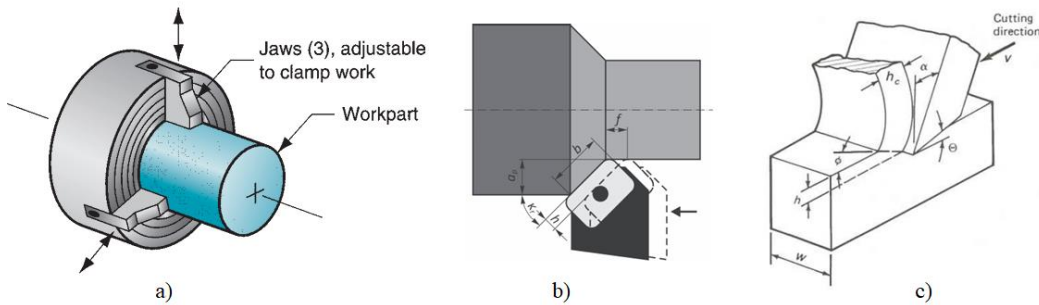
a) Three-jaw lathe chuck [3], b) Turning principle [4], c) Chip removal [5]
